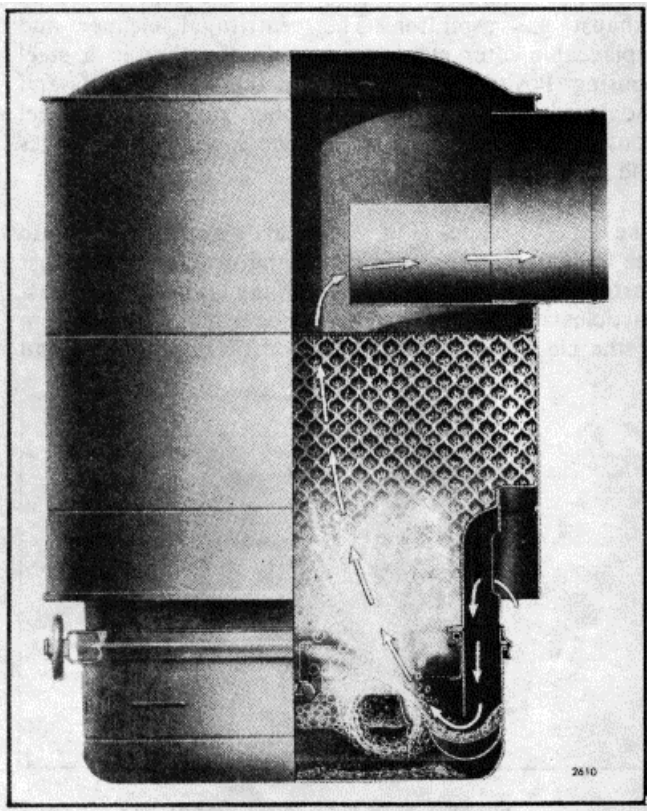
Typical Oil Bath Air Cleaner (Marine Engines)
